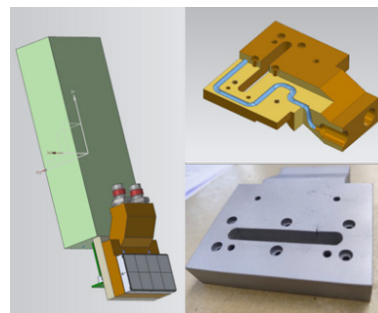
(Left) Design study of the planned Jungfrau air-box housing with orthogonally aligned PCB board. (Right) Prototype of a 3D printed cooling block with integrated water channel.
